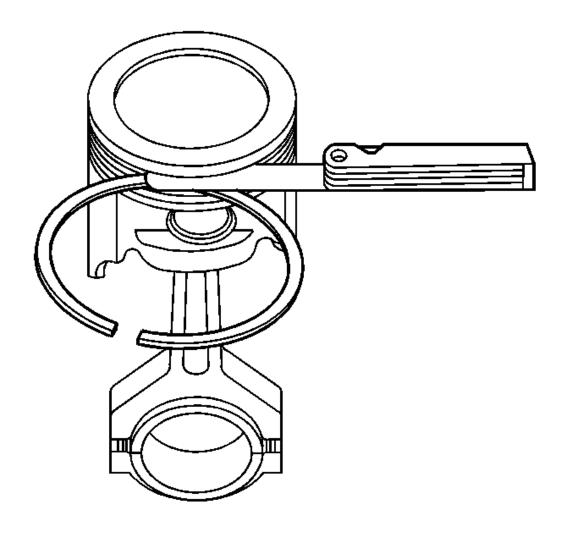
Inserting Piston Ring Into Ring Groove Courtesy of GENERAL MOTORS CORP.
